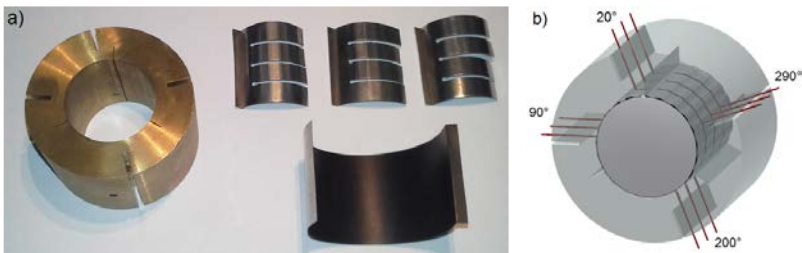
Parts of the tested foil bearing before its assembly (a) and location of the temperature measurement points (b)
